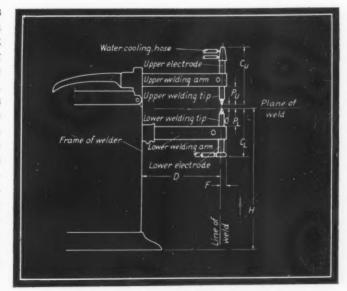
When designing for welding by a standard machine, dimensions of that machine should be kept in mind
